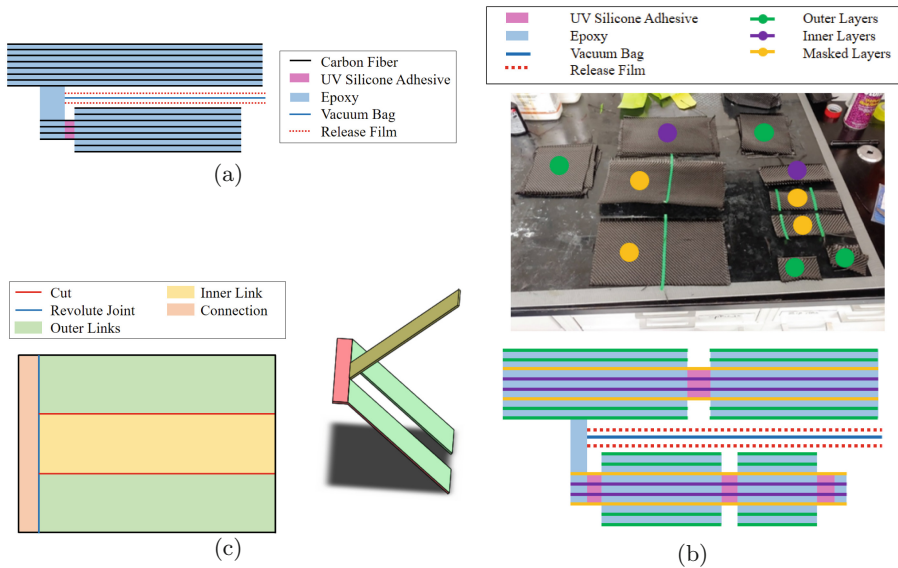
(a) Layup schematic of branching joints, which enable the connection of separately cut layups. (b) Schematic of fold and cut locations needed to obtain double shear revolute joints. (c) Layup for active aerodynamic spoiler, including reference to carbon fiber cutouts used. Each of the main layers in the layup use 2 inner structure layers, 2 masked layers, and 8 outer cutouts.
